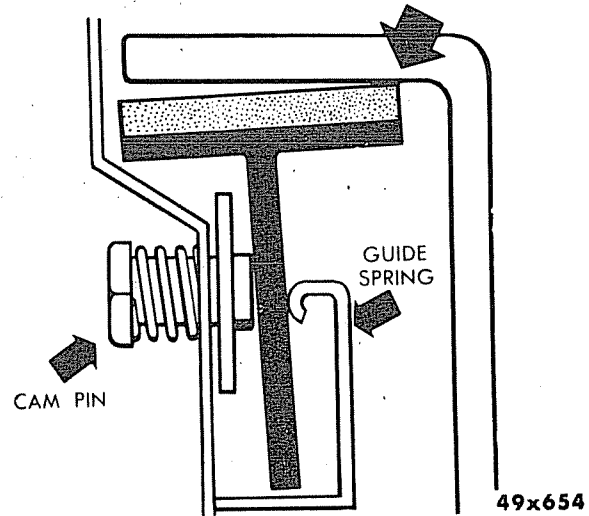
Too Much Clearance Between Web and Cam Pin.
